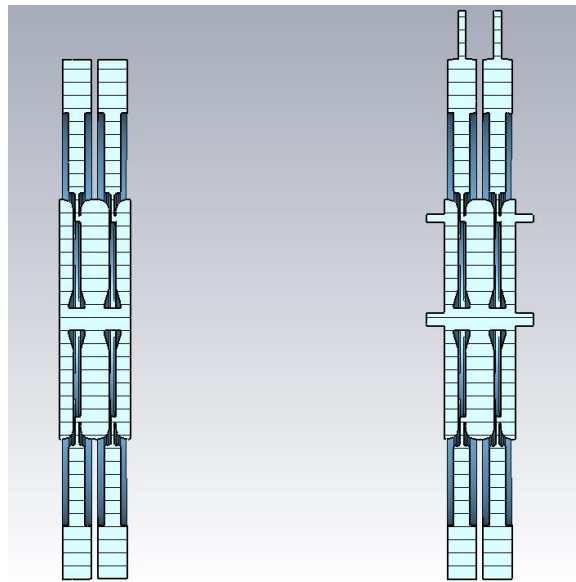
Final ACS Cavity Structure to be Built and Tested
